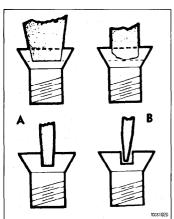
Screwdrivers should be kept in good condition to prevent injury or damage which could result if the blade slips from the screw
